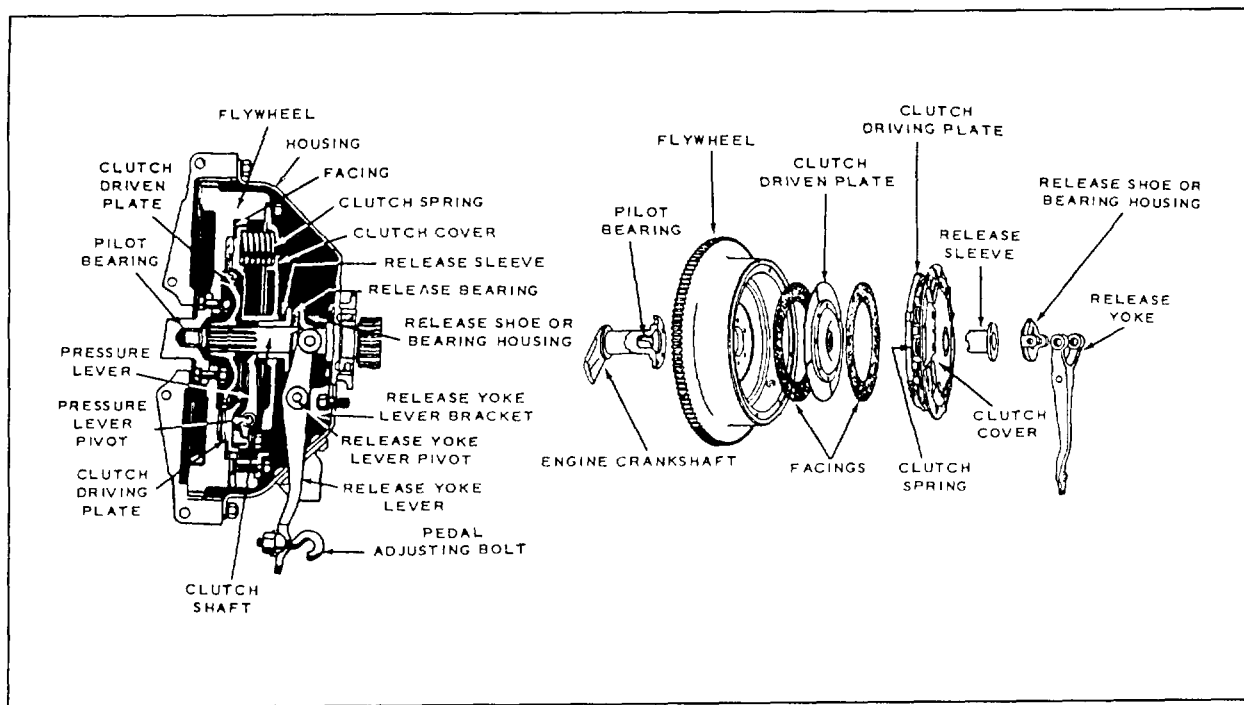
Exploded and cross-sectional views of a plate clutch.
